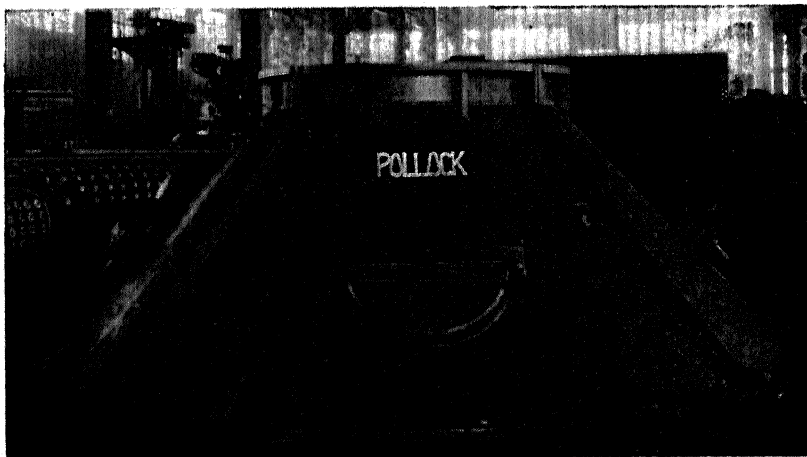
Gas seal hood of welded steel construction.
